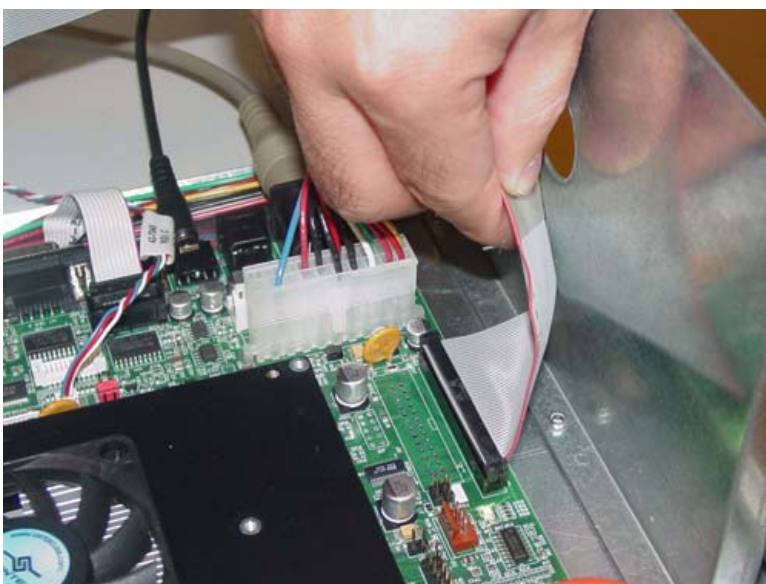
Connect the Printer Cable to J27 of the Motherboard
